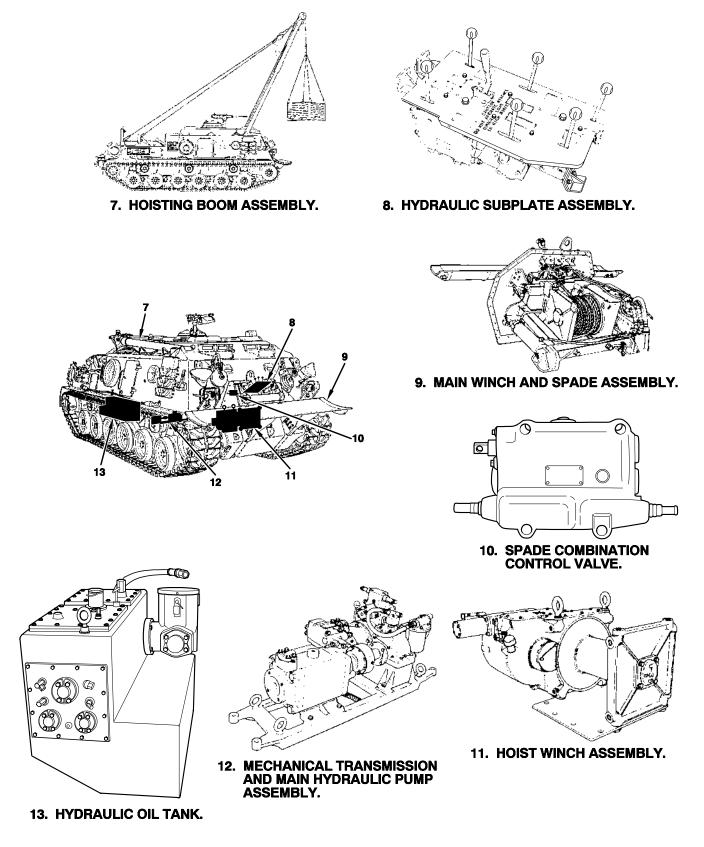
Location of Major Components, Assemblies, and Auxiliaries (Sheet 3 of 8).
